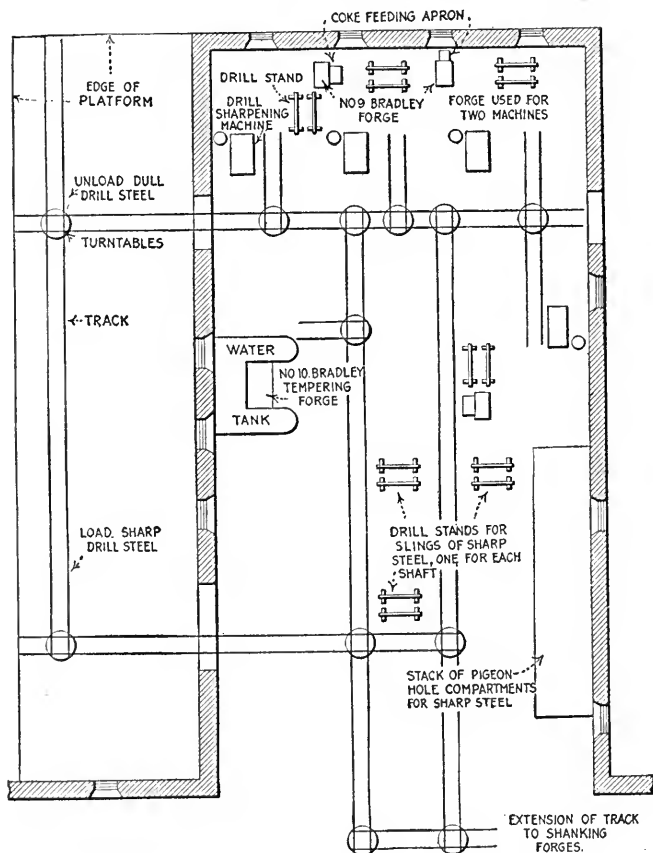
LAYOUT OF THE QUINCY DRILL-SHARPENING SHOP.
